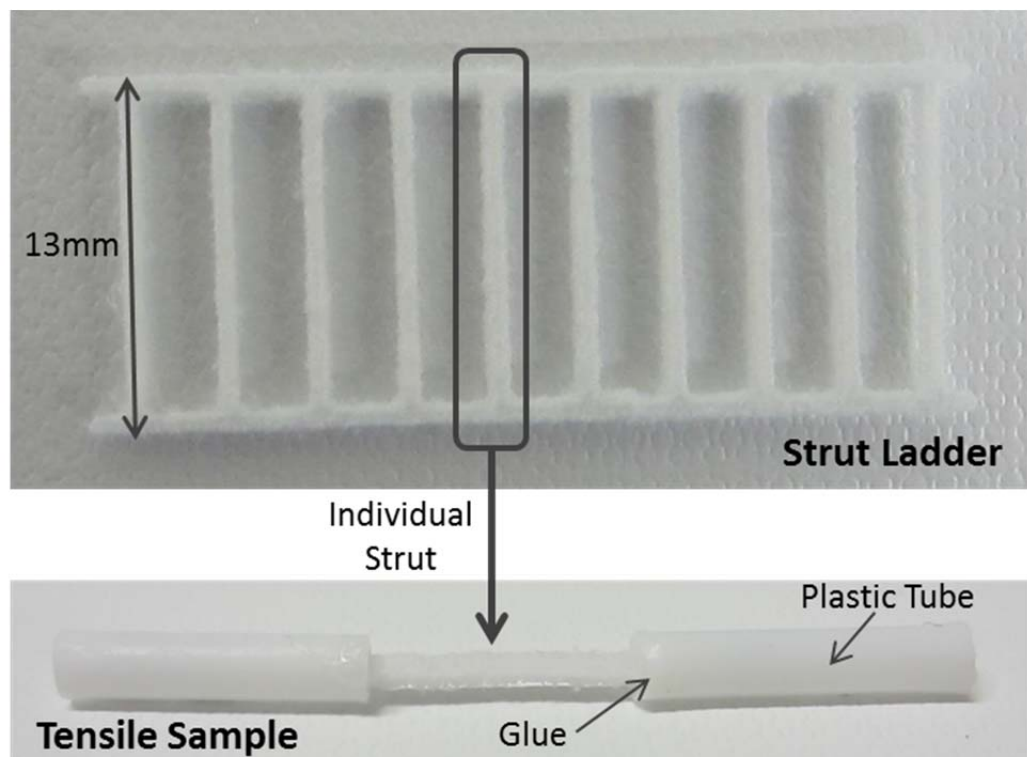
Example of a PCL SLS strut ladder, top, and tensile sample assembly, bottom.
